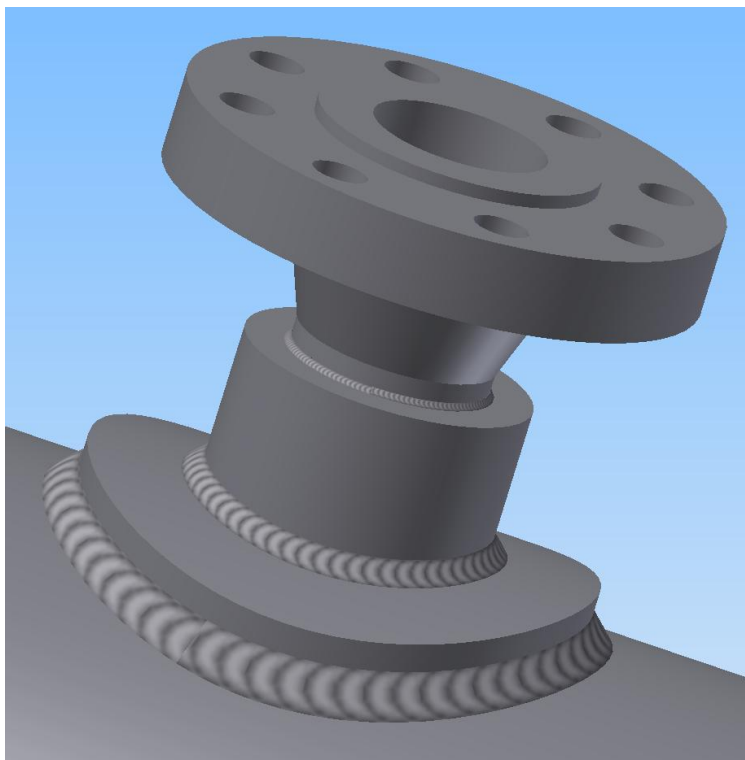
Weldment details for the thin wall pressure vessel.
